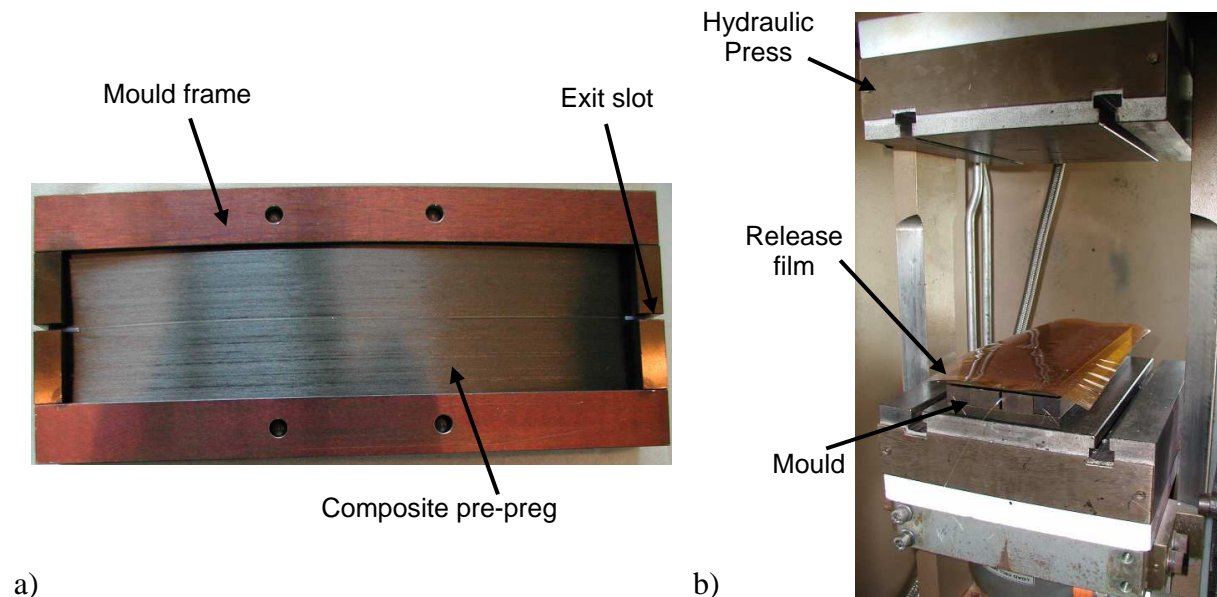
a) Pre-preg plies stacked in steel mould. b) Mould in hot-press (plastic release film prevents sticking to top platen).
